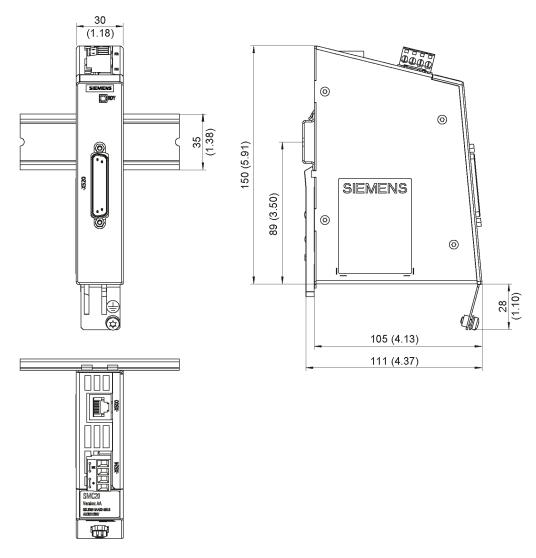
Dimension drawing of the Sensor Module Cabinet SMC20, all data in mm and (inches)
